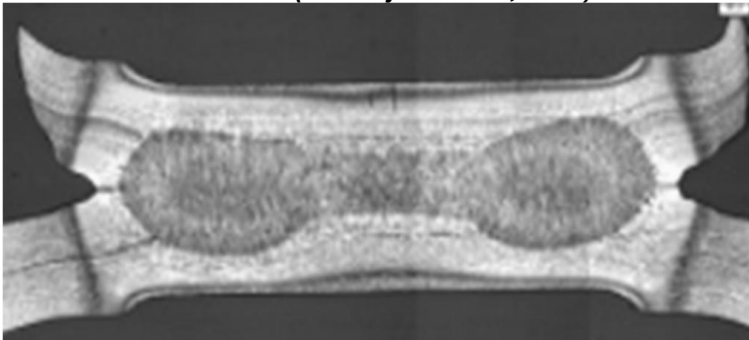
Cross section of a tensile tested resistance spot weld using a three step weld scheme in TRIP700 steel containing 0.216 wt% C and 0.033 wt% P (Den Uijl & Smith, 2006).
